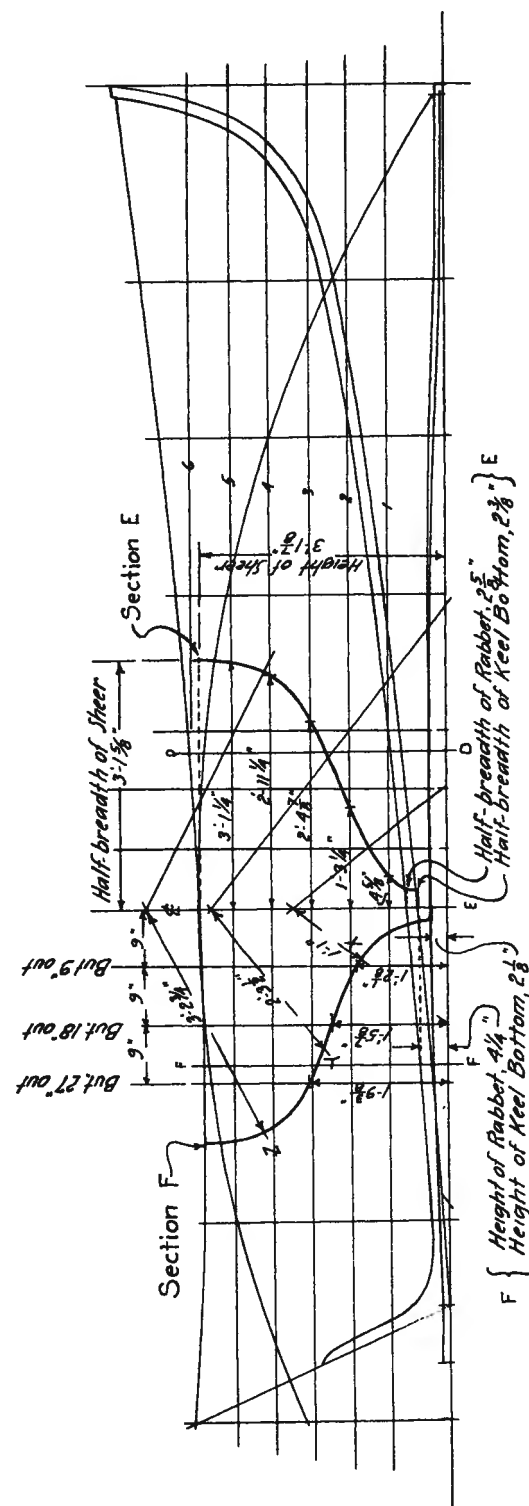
Lofting a 17-foot Hampden Boat. Fourth stage—drawing sections in the body plan.
